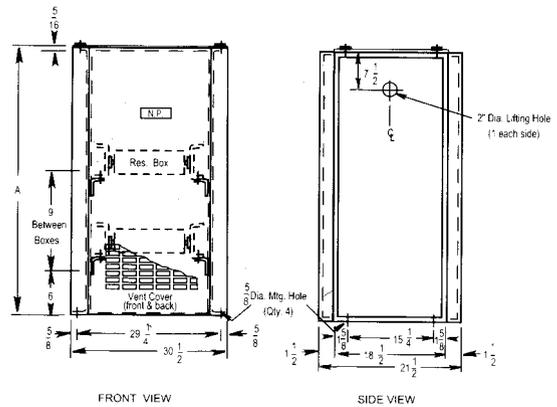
Mounting rack for IC9141 resistor boxes with perforated metal covers front and back
